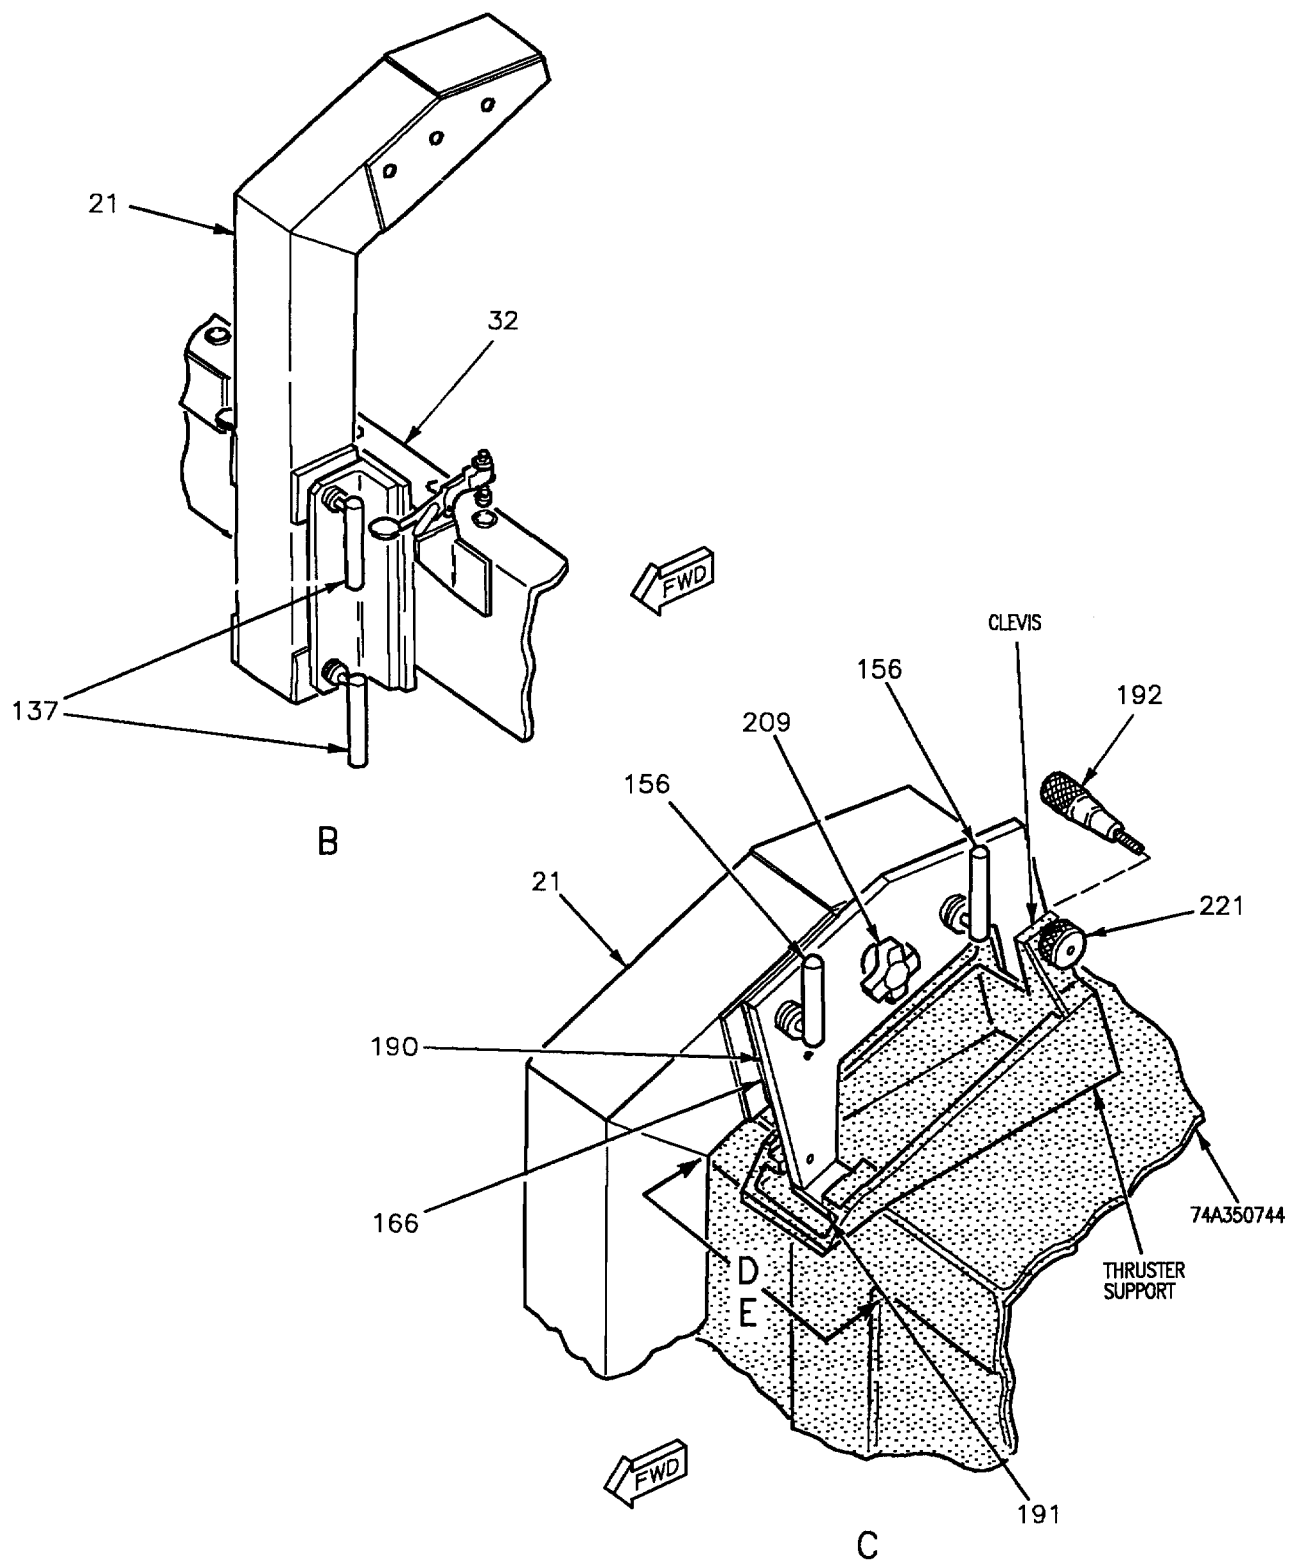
Inspection or Replacement - Thruster Support (Sheet 2)
